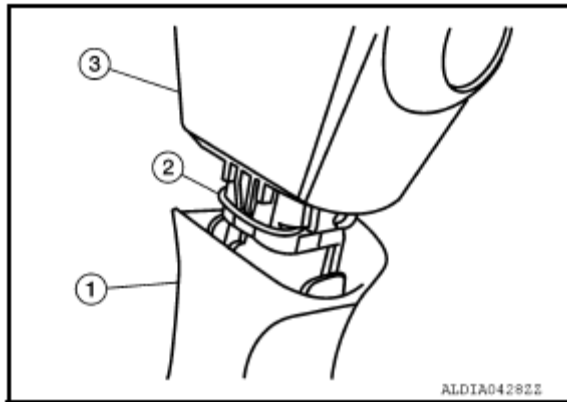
Identifying Shift Selector, Knob Cover And Lock Pin
